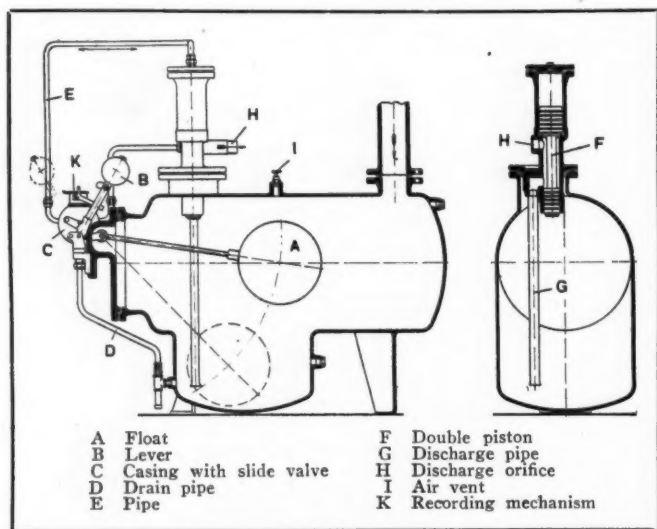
Section through a recording steam trap for discharging 22,000 to 37,500 gal. per hr. at working pressures of 70 to 140 lb. per sq. in.
